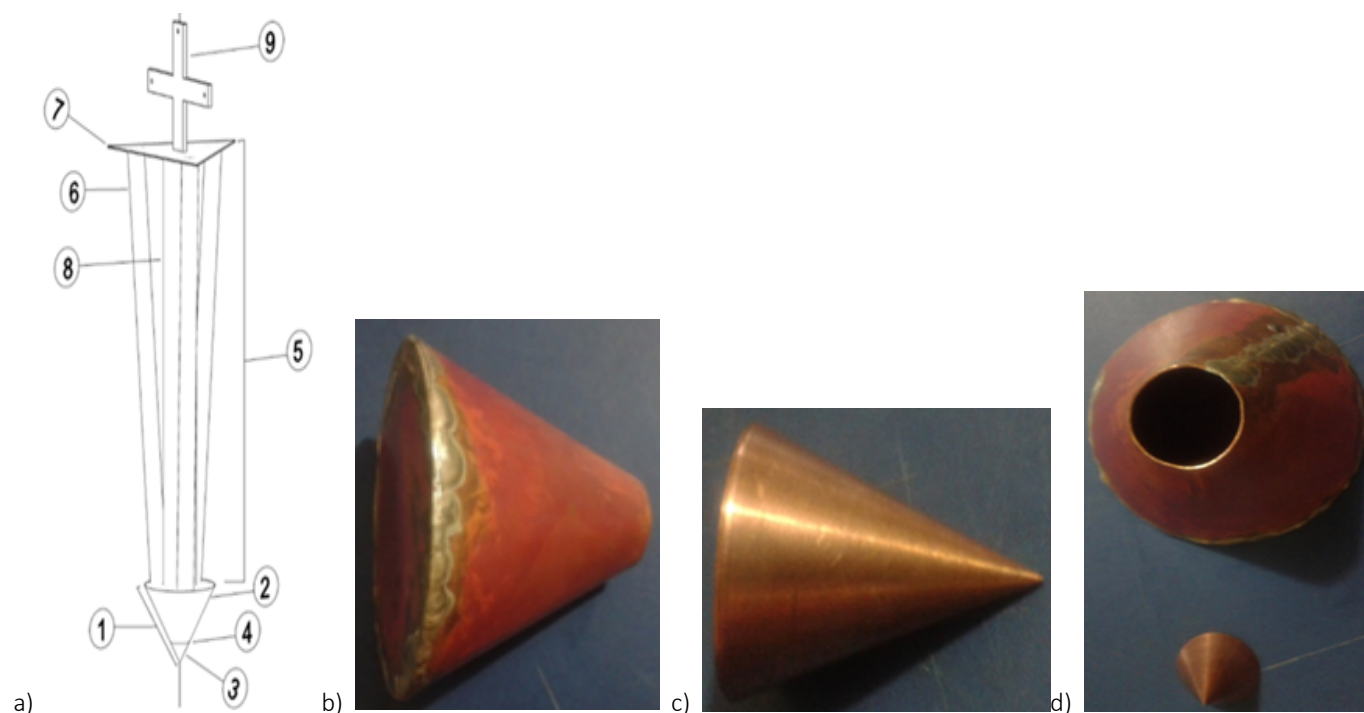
Cone-shaped section of the grounding electrode prototype: (a) assembled cone with numbered parts; (b) hollow copper cone; (c) solid copper tip; (d) complete cone after brazing.
